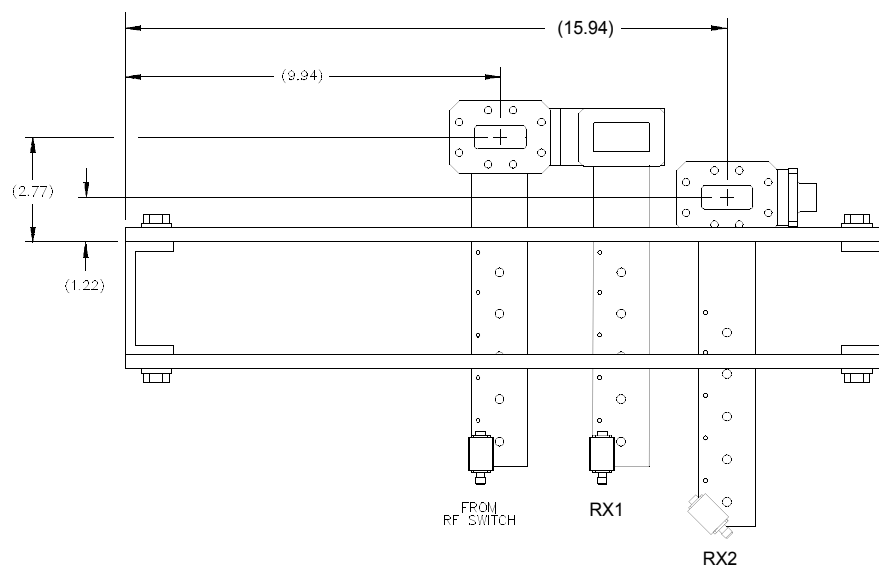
ACU, hot-standby (front view), mechanical drawing
